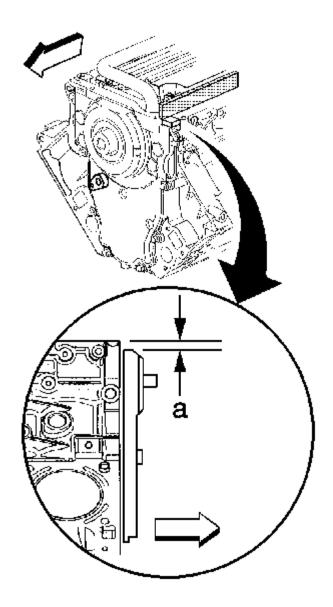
Measuring Oil Pan Surface Flatness & Front Cover-To-Engine Block Courtesy of GENERAL MOTORS CORP.
